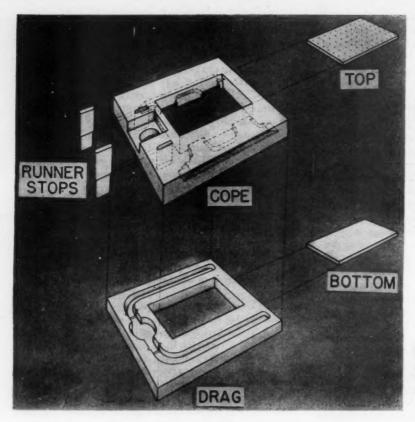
(Left)—Sketch of Mold B. Runner is ¾ in. deep by 1 in. wide and is in the drag. Gates are ¾ in. by 2 in. and are in the cope. Ten different sprues were made to fit this mold. However, the one used in all the work on Mold B, illustrated by following photographs, was round, tapered, and ¾ sq in. at bottom, 2¼ sq in. at top. Consequently, ratio of areas of sprue bottom, runner, and gates is 1:2:4. Various sprue base designs were interchangeable as illustrated by Fig. 2, 4, 6 and 8.
